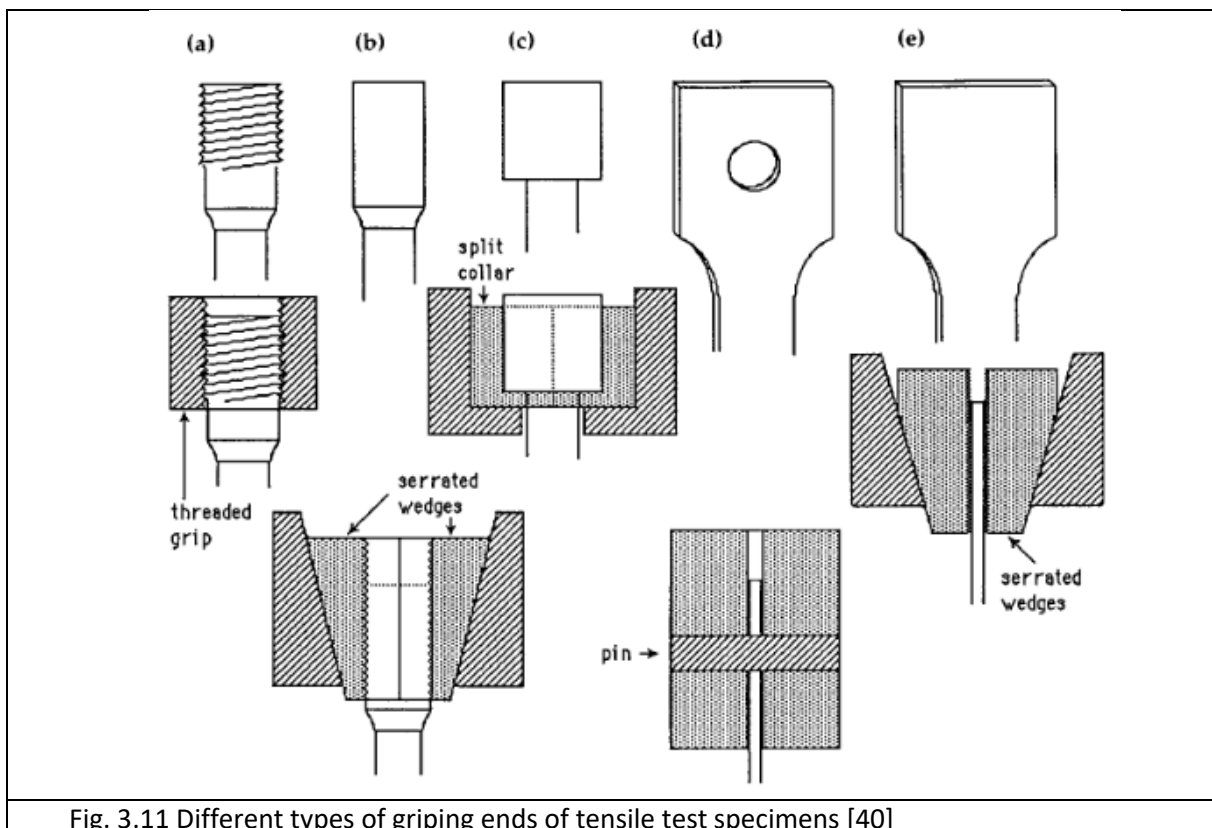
Different types of gripping ends of tensile test specimens [40]
